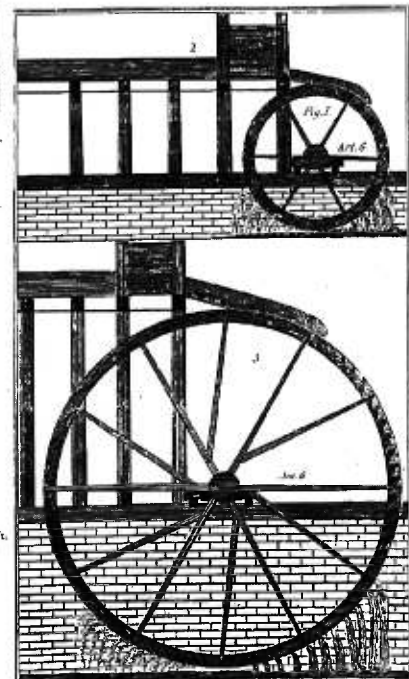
Overshot waterwheels. Dimensions prescribed by Thomas Elkott, millwright, in Oliver Evans, *Young Mill-wright and Miller's Guide* (Philadelphia, 1807).
